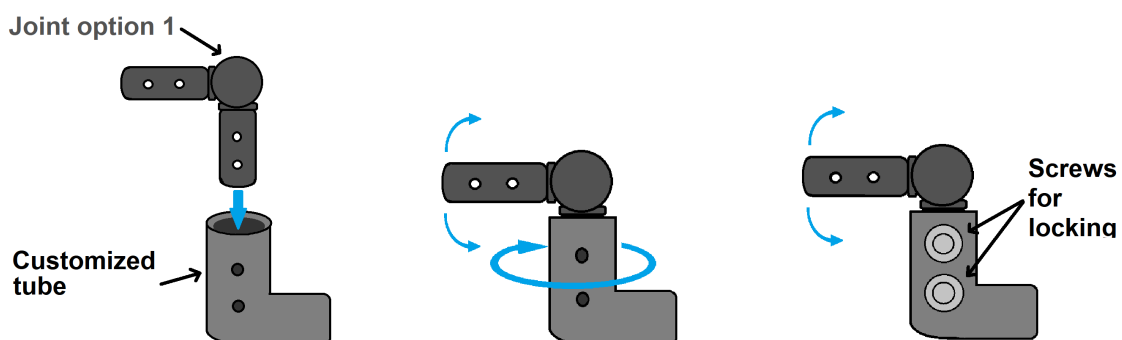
Demonstration of how the customized tube would have allowed for 2 DoF.
